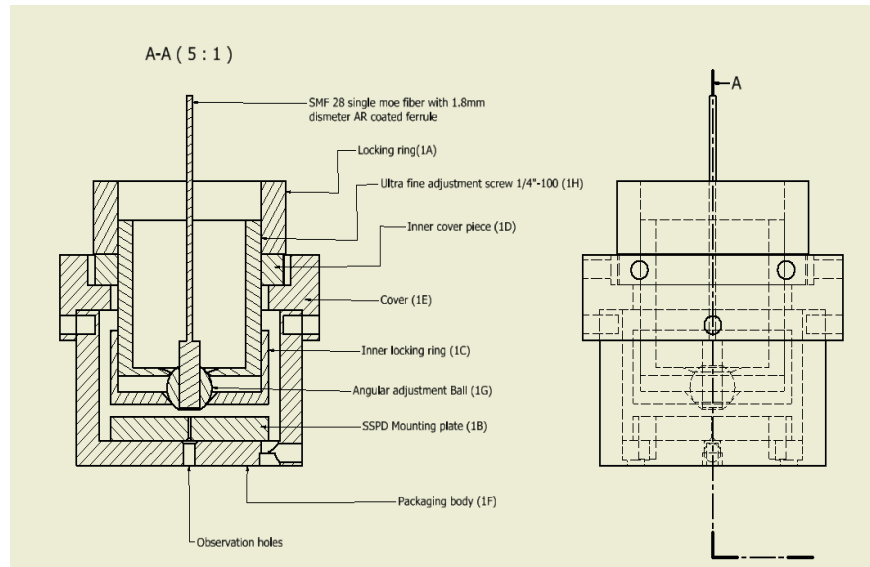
Front and cross sectional view of the CAD drawing for the packaging assembly
